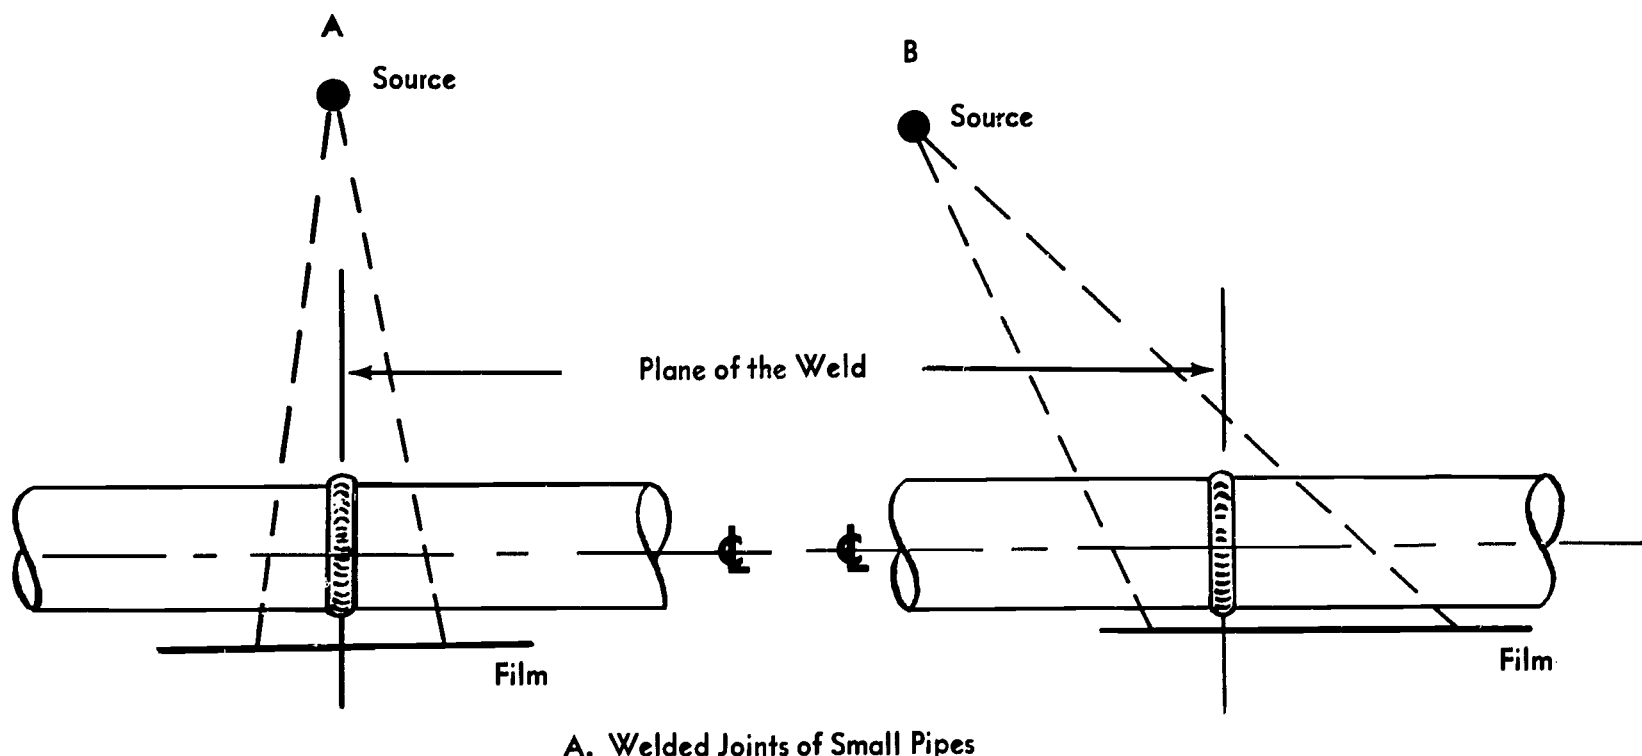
Welded Joints of Pipe.
